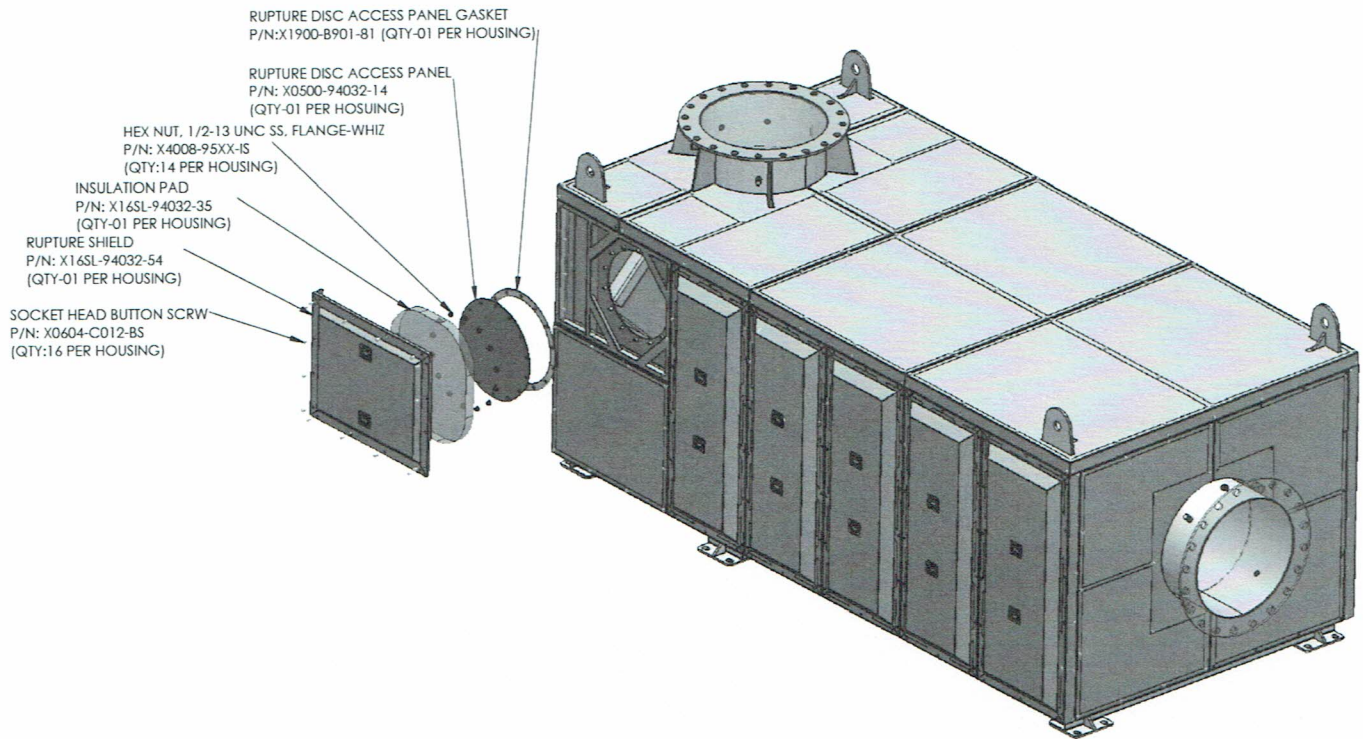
Example of SCRonF Housing with Rupture Disc Exploded View
